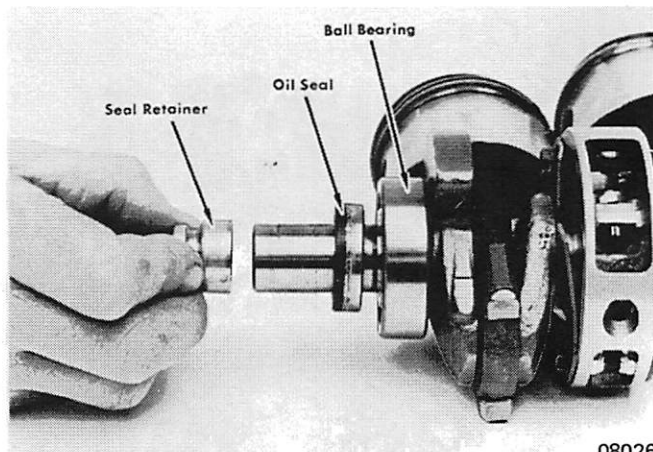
Installing Ball Bearing, Oil Seal and Seal Retainer
